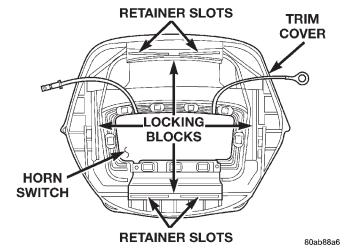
Driver Side Airbag Module Trim Cover and Horn Switch
